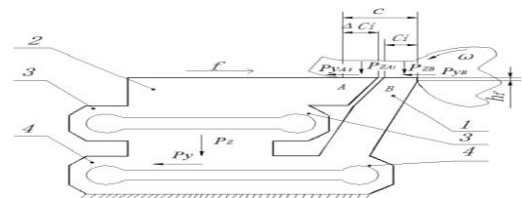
The research of contact loads distribution over a face surface of the cutting tool by the method of the “split cutter” on a lathe with horizontal feed rate f
